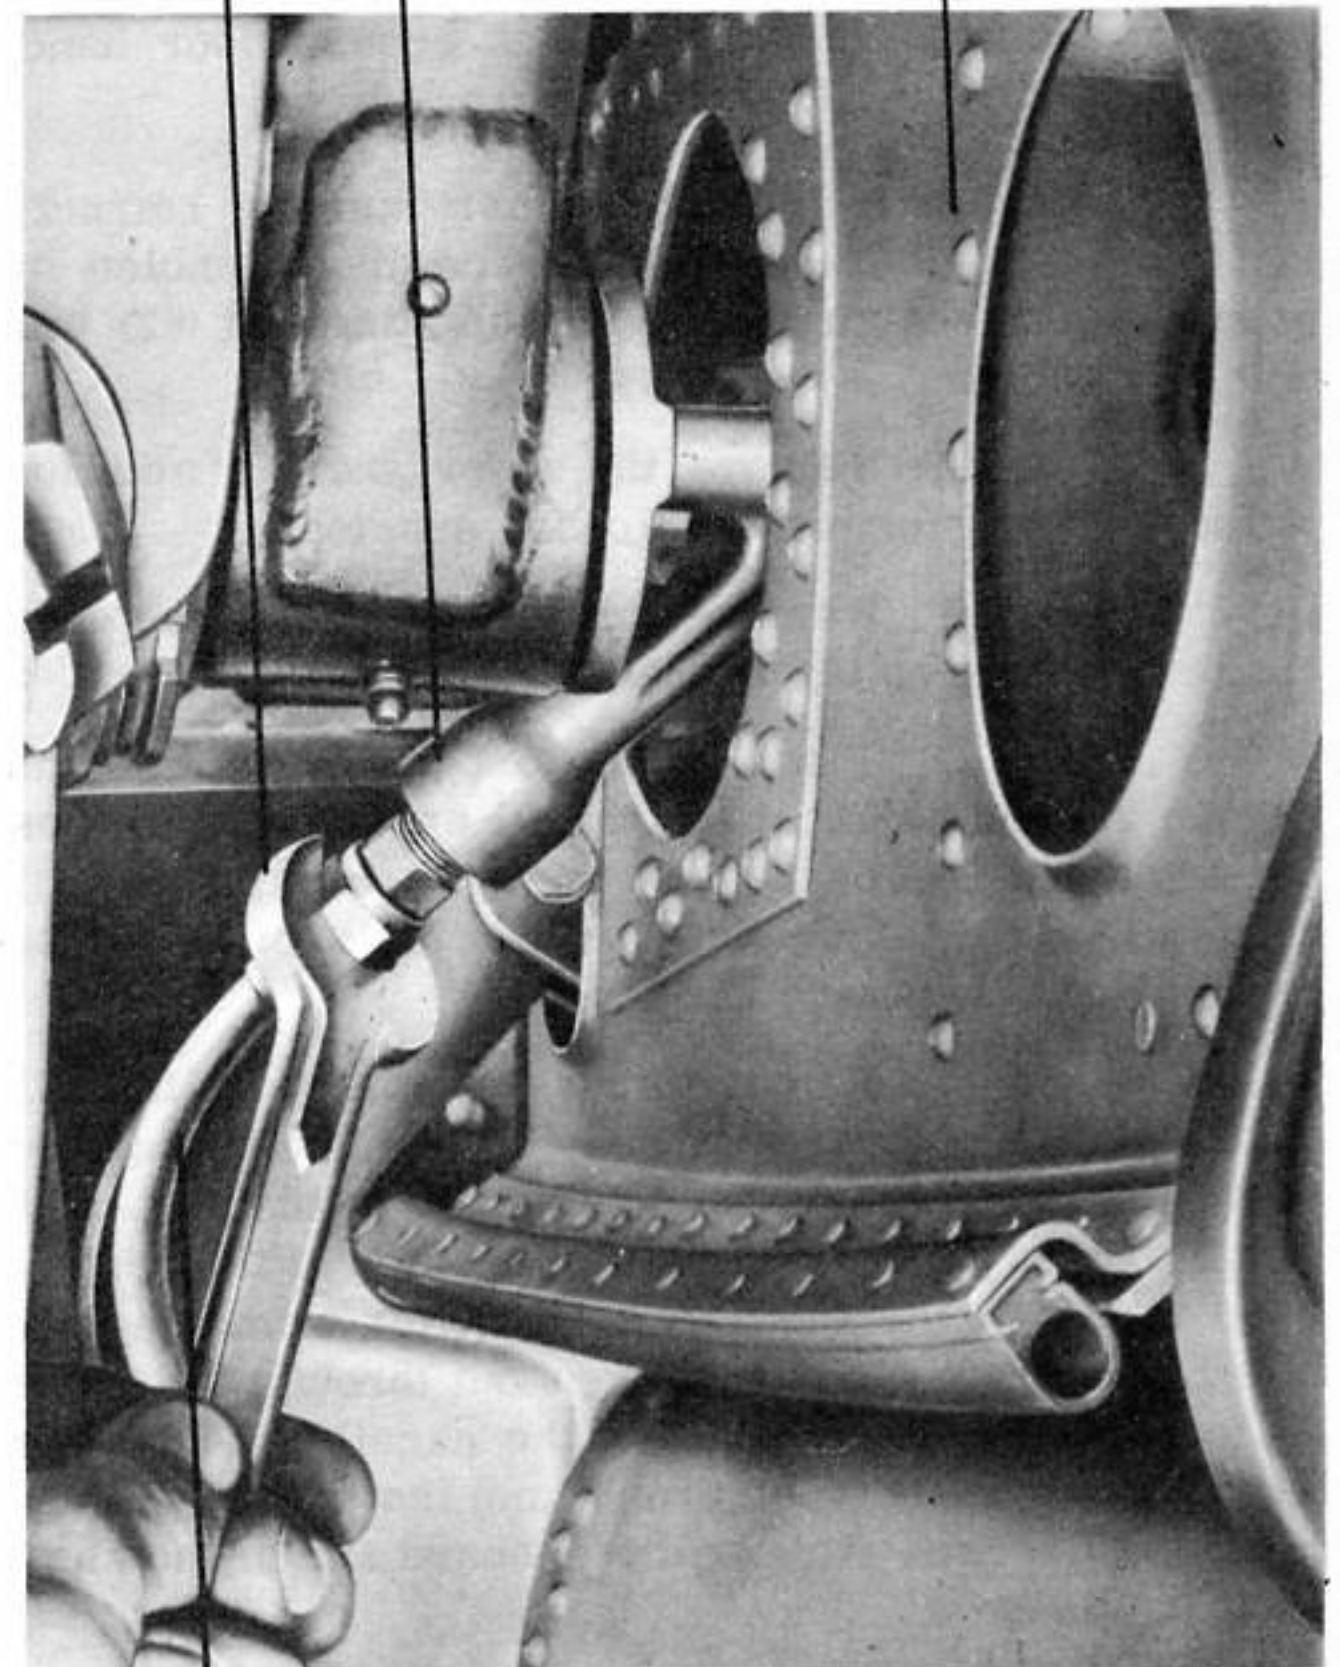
DISCONNECTING ALIGHTING GEAR. DOOR ACTUATING ROD
